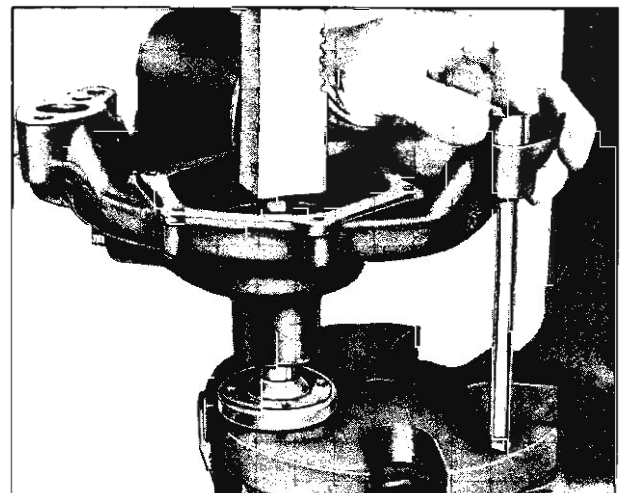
Installing Fan Hub, 8 Cylinder (283 Cu. In. Engine)
